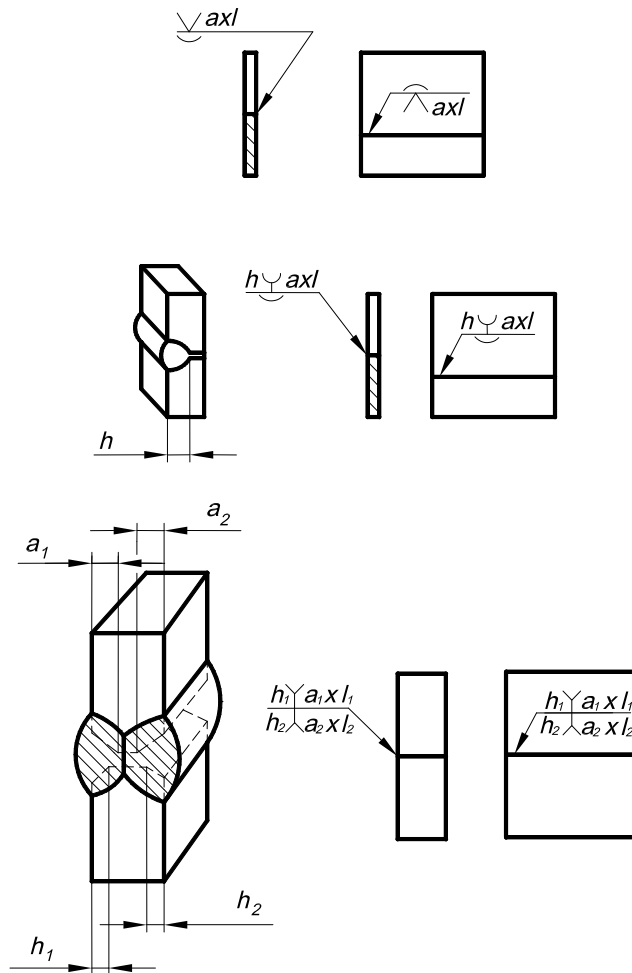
Dimensioning single V-butt, single Y-butt and double V-butt joints
